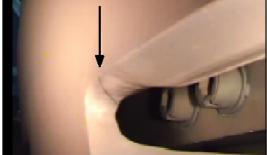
Thermal Shield Flexure Showing Weld Locations
